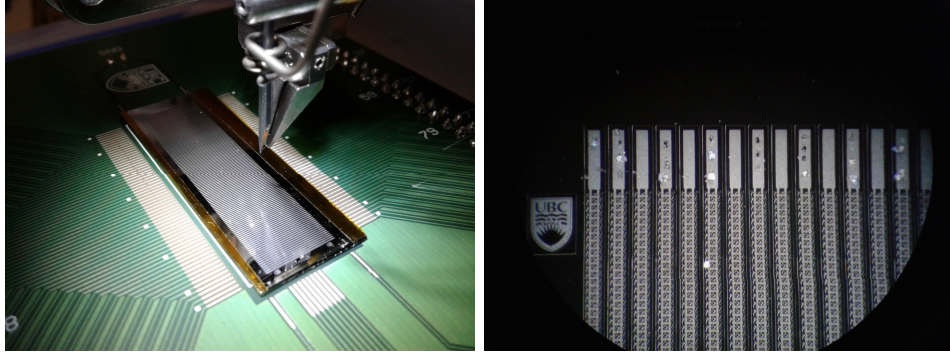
PolyCMUT linear array being wire bonded to interface PCB using aluminum wires. Forces on the bonding tool damaged electrodes on the surface of polyCMUTs with only a few successful bonds.
